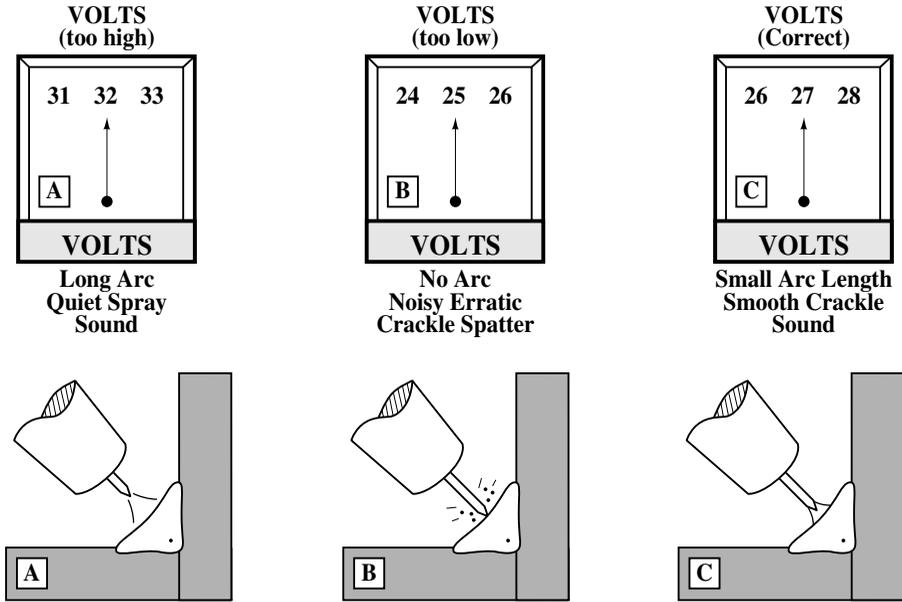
Setting Optimum Voltage for GMAW Spray Transfer Welding.
